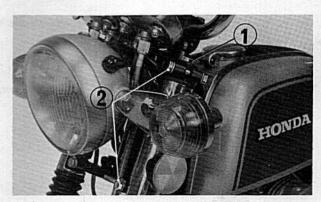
(1) Front fork bolt (2) Fork securing bolt
